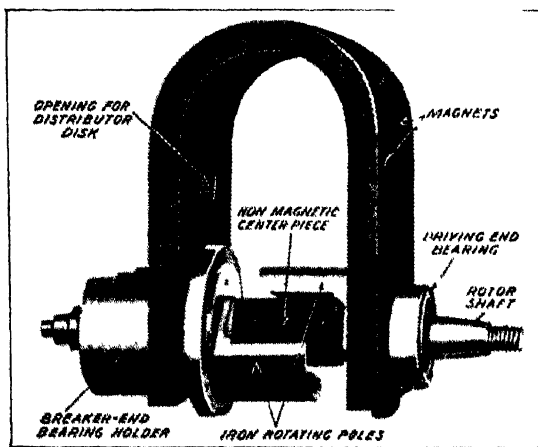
Assembly side view of magnets, rotor, and bearing holders of Dixie high-tension magneto.
